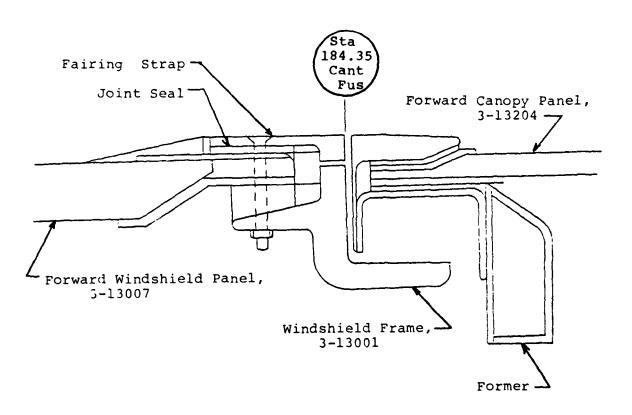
T-38 Forward Windshield Aft Edge and Forward Canopy Leading Edge Attachments.
